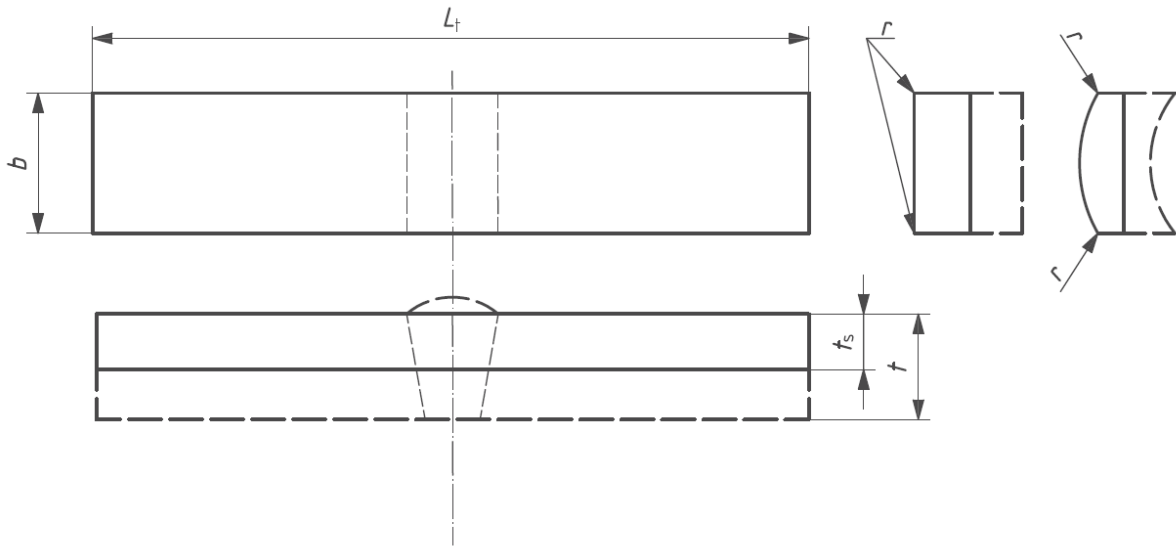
Transverse face bend test specimen for a butt weld (TFBB).
